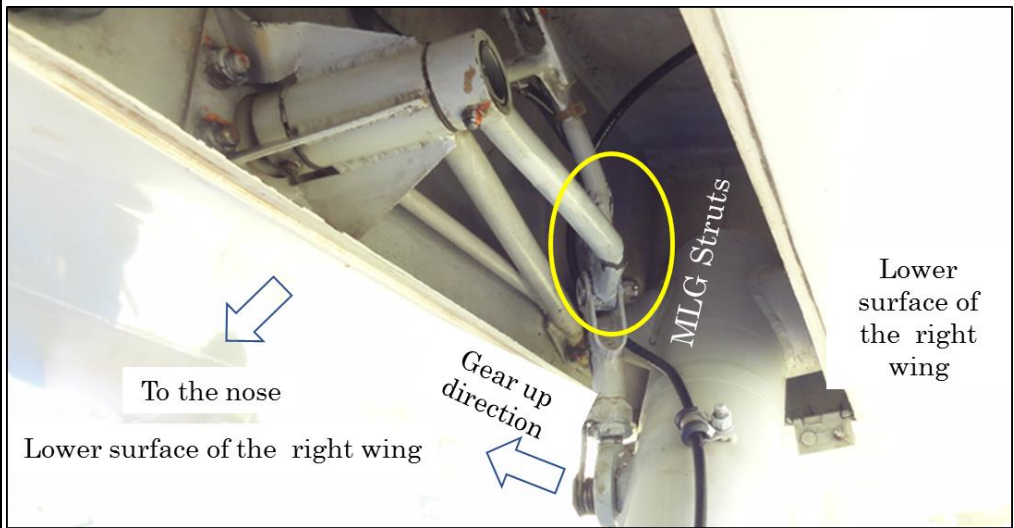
Damaged and deformed gear down lock mechanism of the right main landing gear
